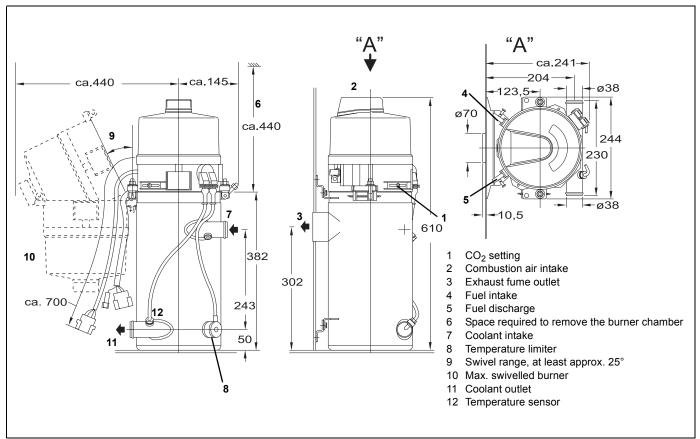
Dimensions of the Thermo 231 / 301 heater (vertical installation)
